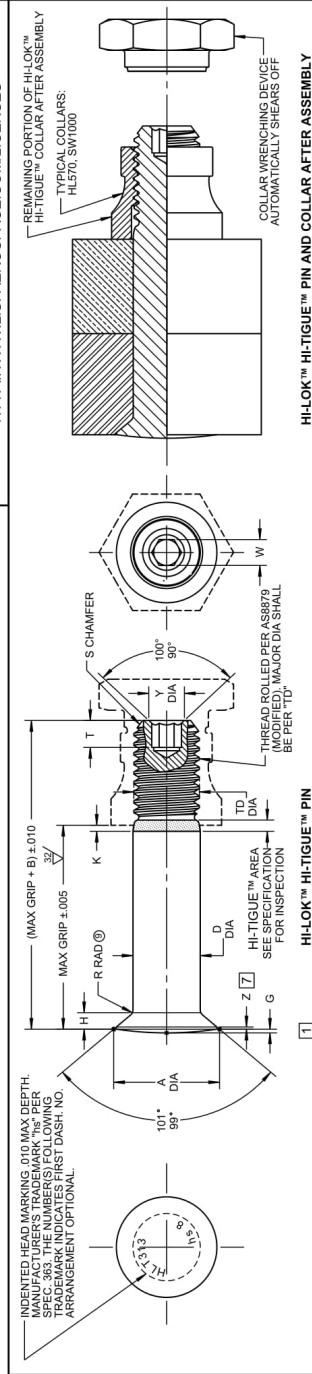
Dimensional drawing of the HLT53 fastener family used in this study. The geometry includes a protruding head configuration with defined grip length and shank diameter.
